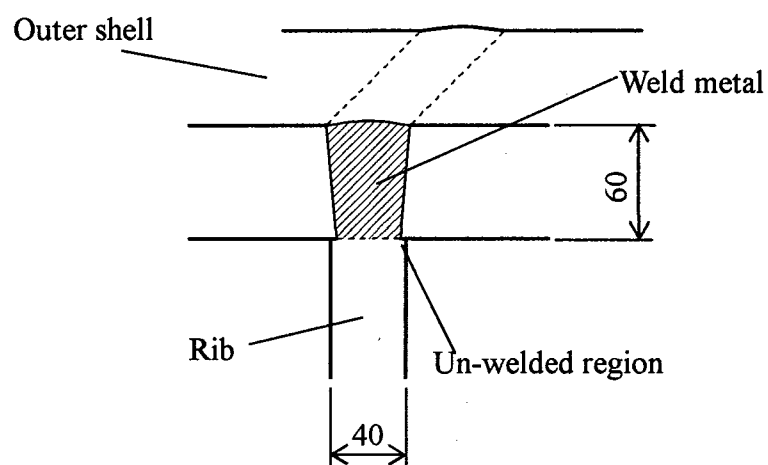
Plug Weld between Outer shell and Rib
